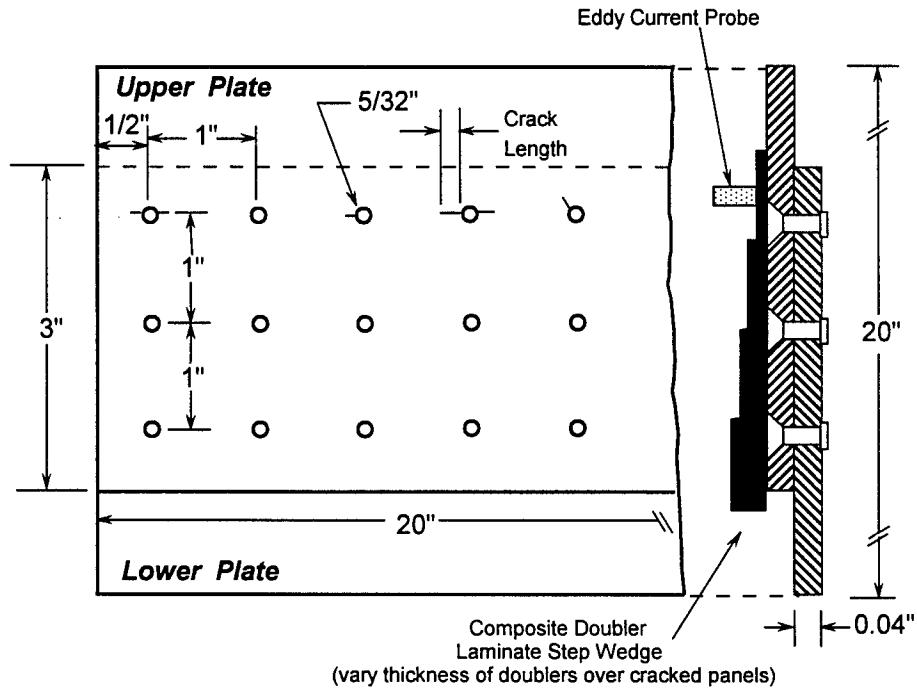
Test Set-Up for Detection of Surface Cracks Through Composite Doublers
